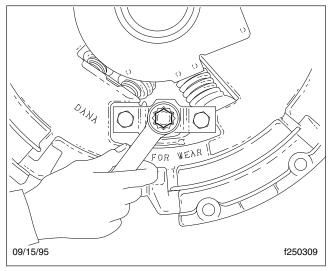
, Adjustment with Kwik-Adjust (bell housing shown removed)
